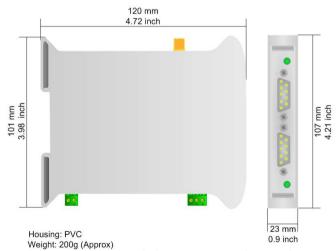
Mechanical dimensions scheme for HD67300-111-A5, HD67300-121-A5
